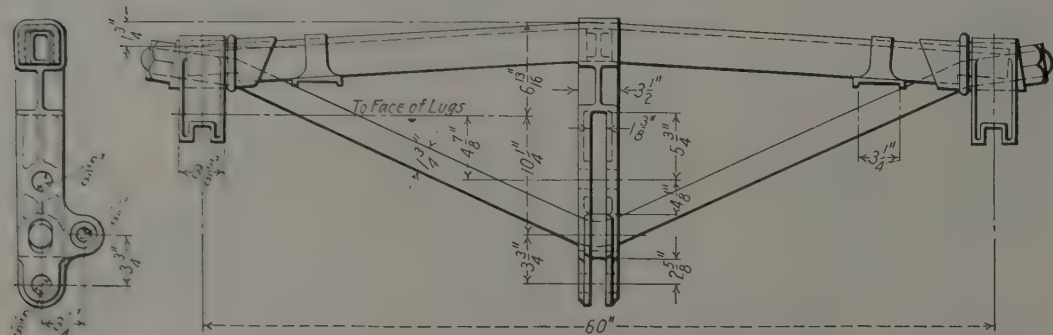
No. 7 Buffalo Truss Brake Beam. Buffalo Brake Beam Company.
